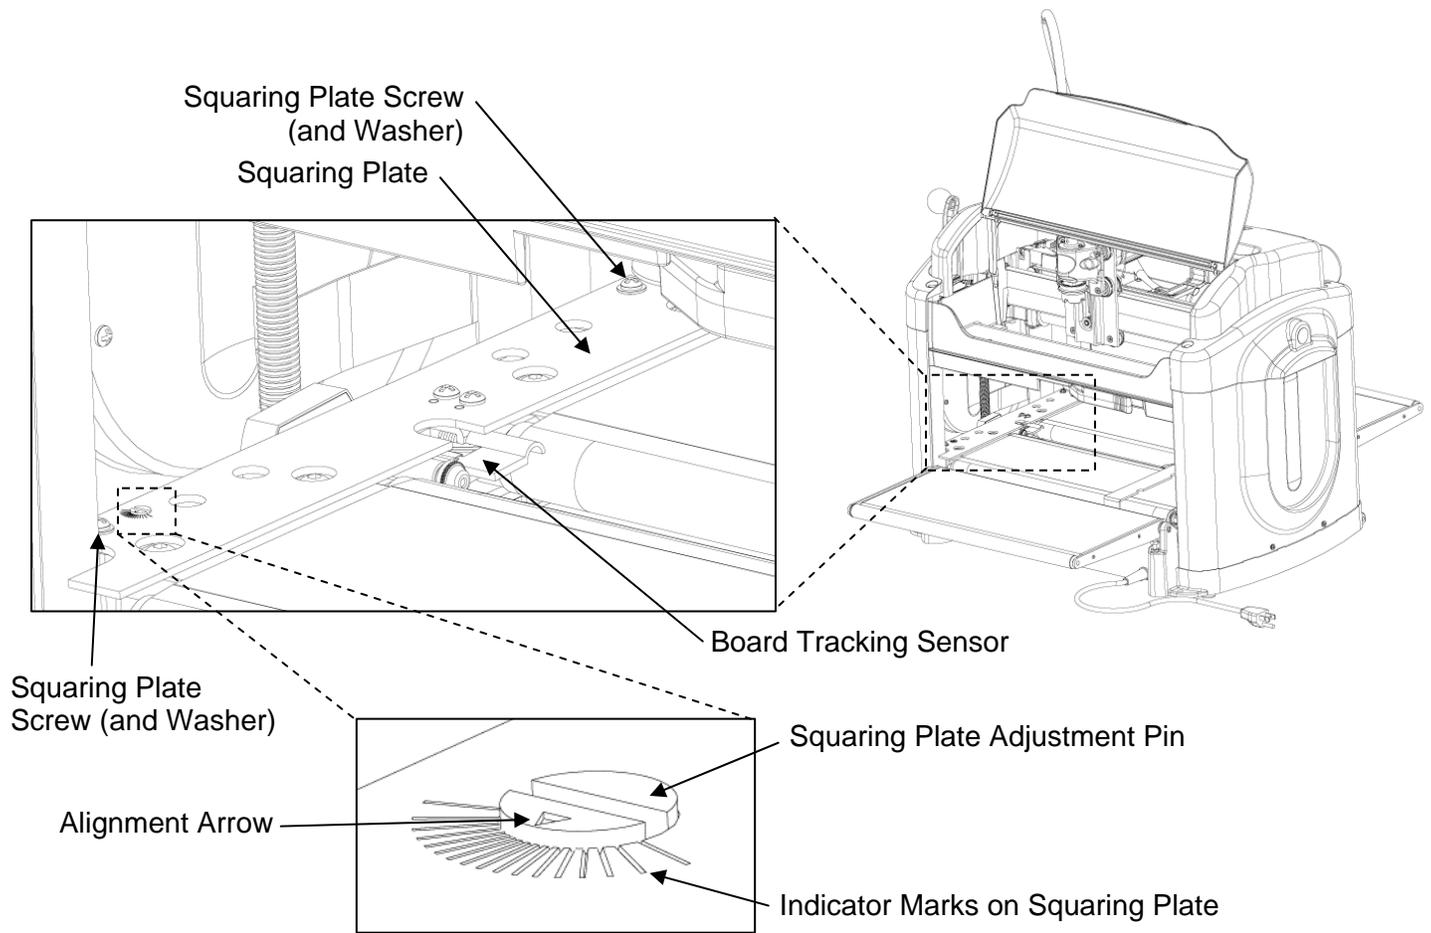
DETAILED VIEW OF THE SQUARING PLATE ATTACHMENT
